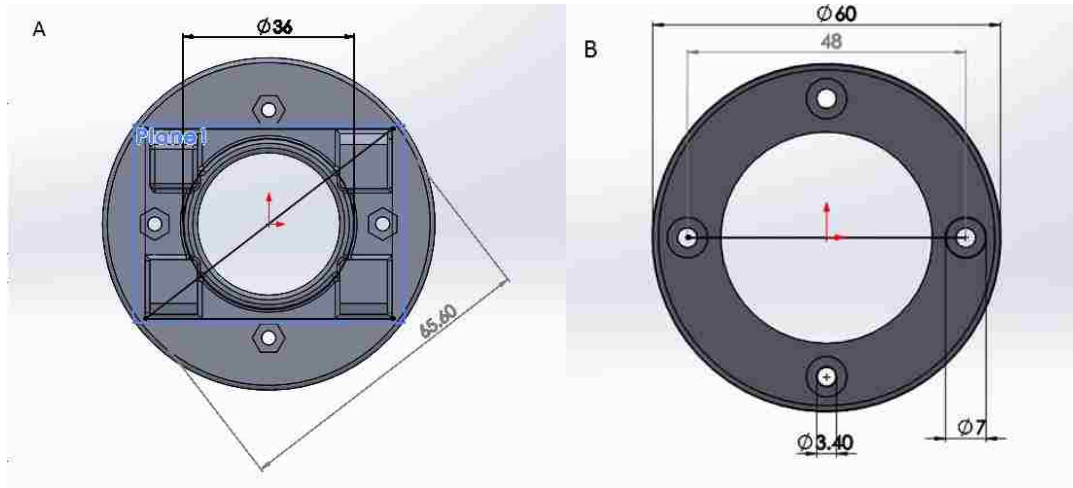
Dimension of the gear rack part (A) and anchor plate (B)
